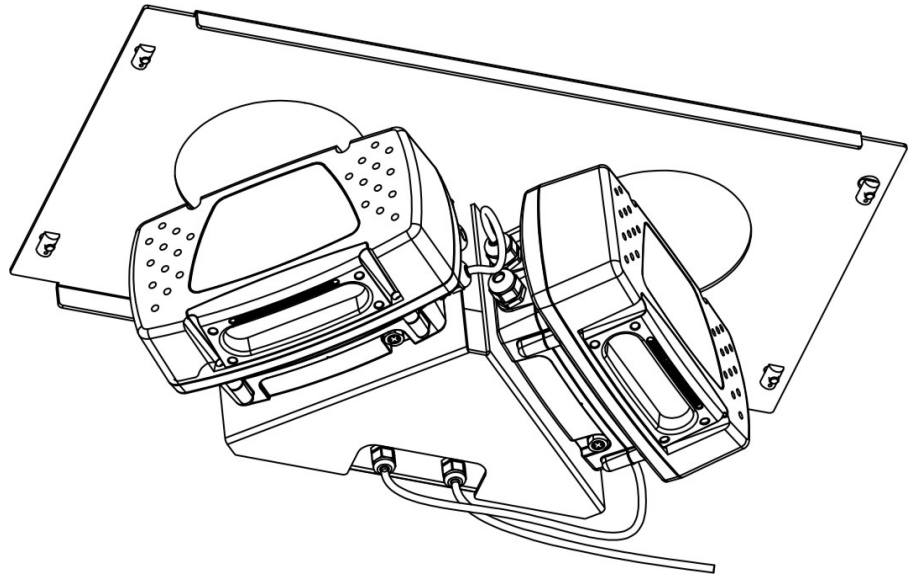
X-Pattern Mounting Bracket (XMB) Assembly
